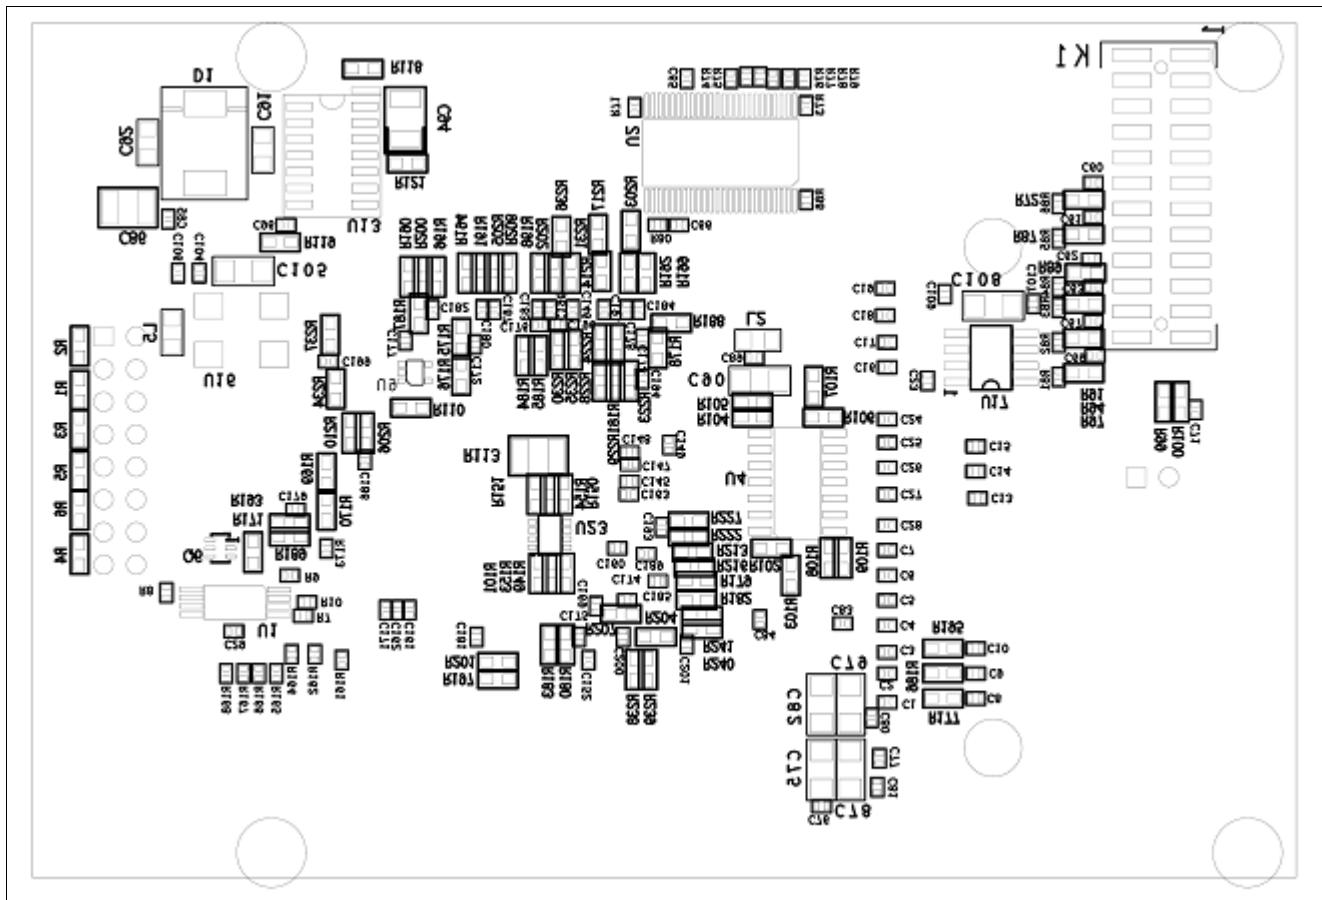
Assembly Drawing of the Logic Board v1.2 (Bottom)
